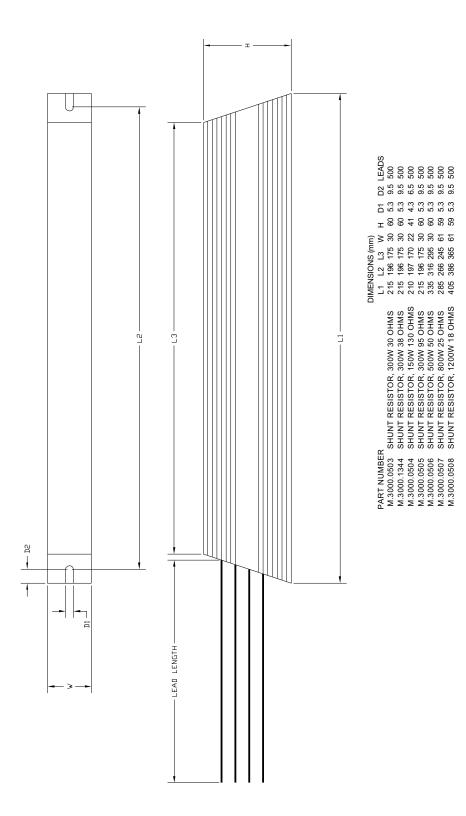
Mounting Dimensions for 460V External Shunt (P/N M.1302.7063)
